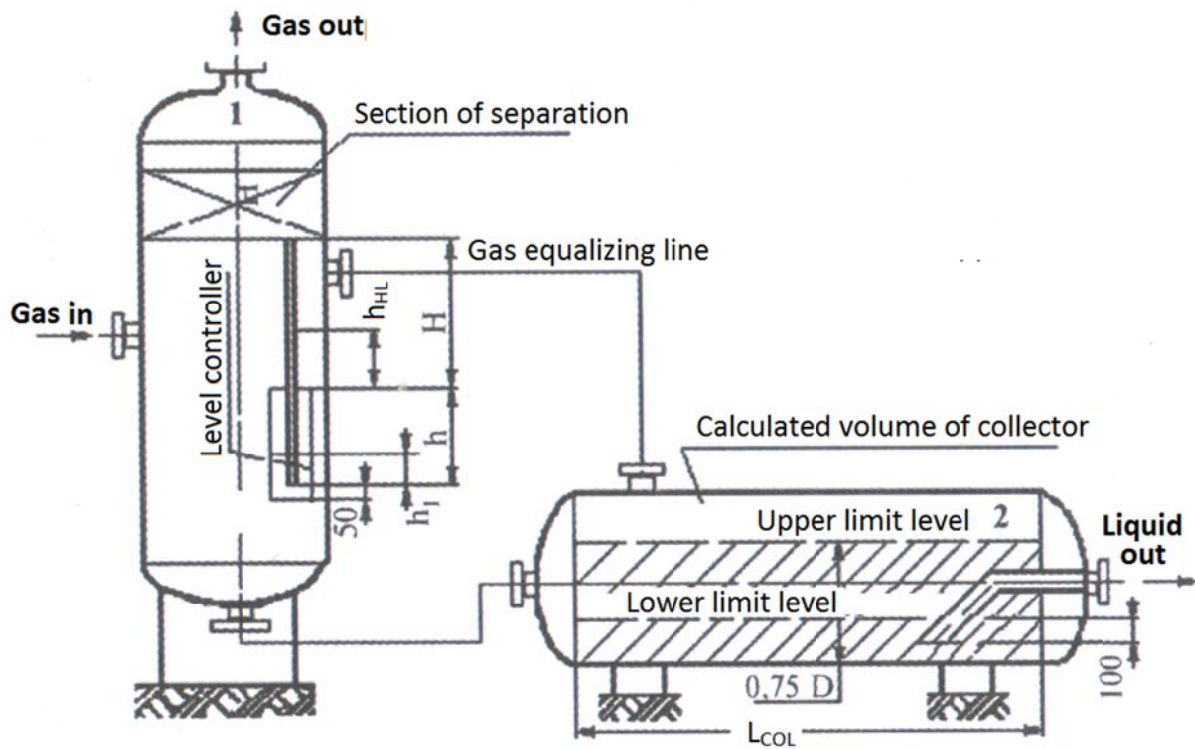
Sketch of the gas mesh separator with a horizontal external liquid receiver layout
